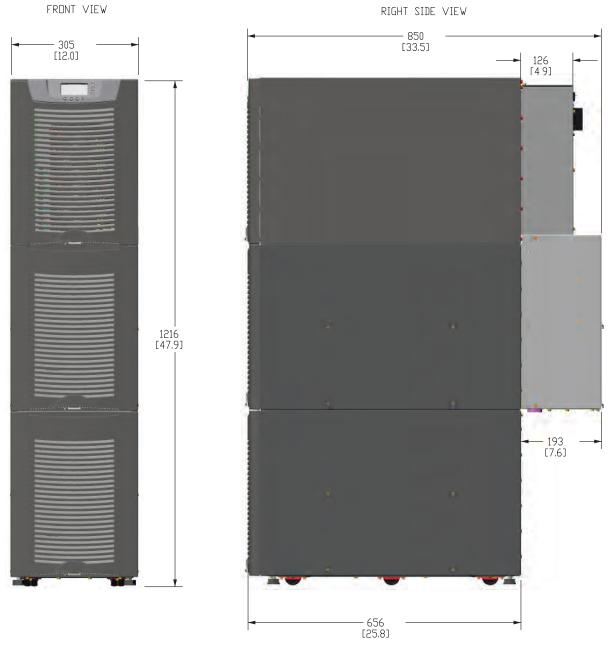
UPS Cabinet Dimensions (3-High Front and Right Side Views)
